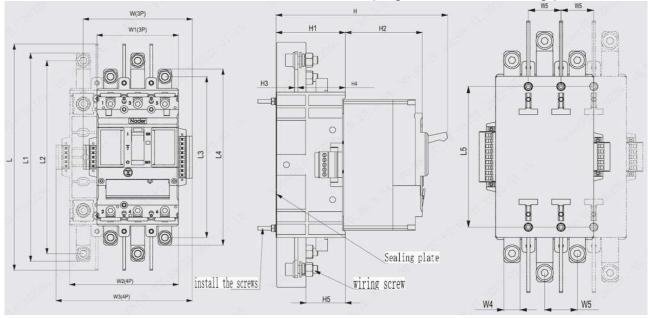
3P, 4P Outline dimensions of plug-in front board wiring products Table 21 Outline dimensions of plug-in front board wiring products (unit: mm)
